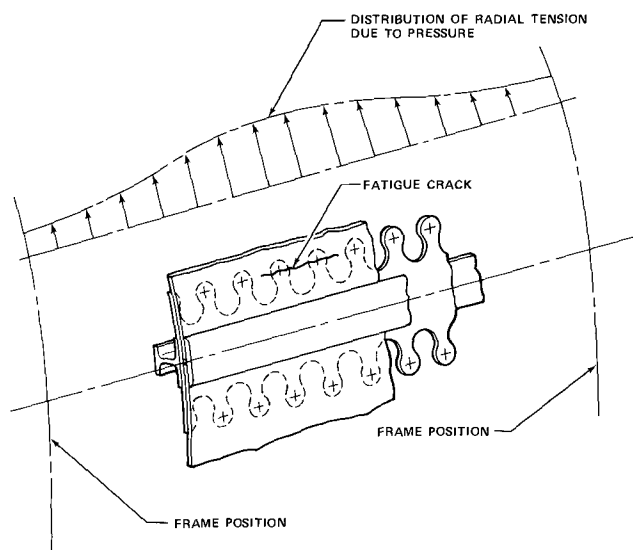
Horizontal splice, fatigue crack location.
